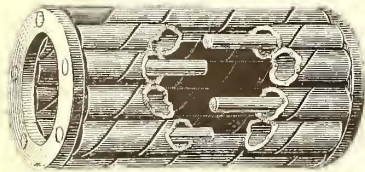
ROLLER BEARING FOR TROLLEYS.
